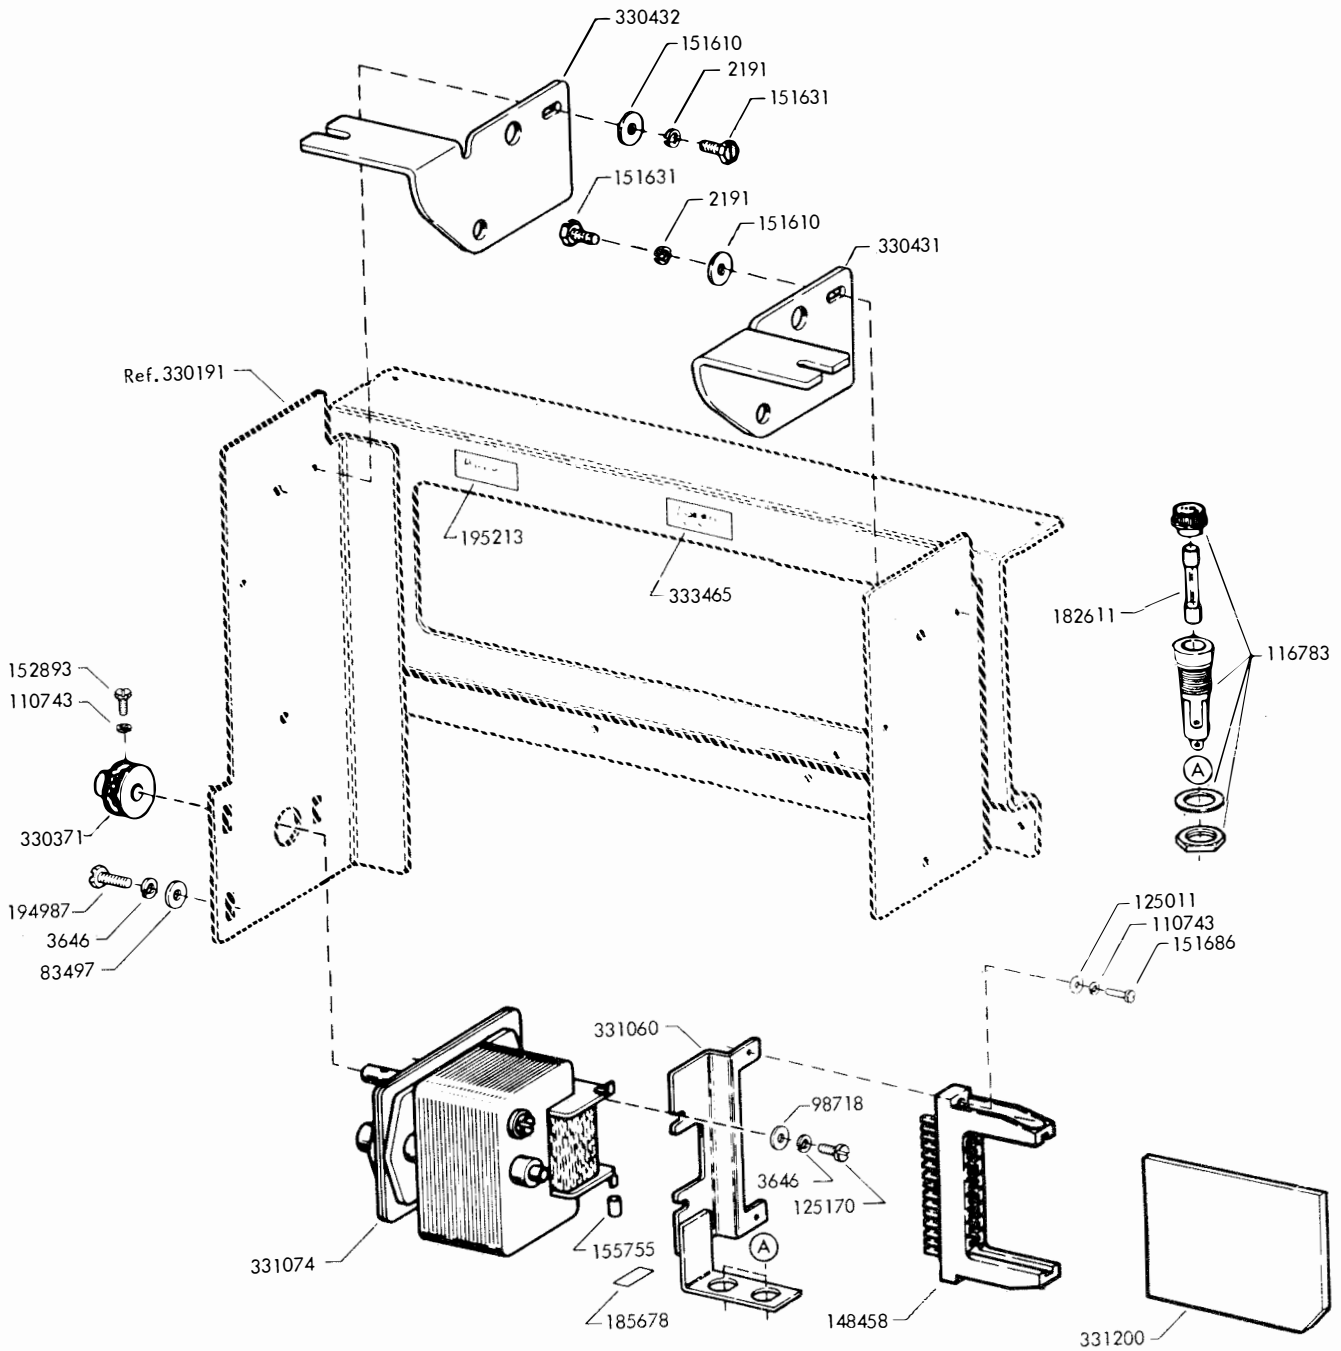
PAPER WINDER (DAPW) MOTOR AND MOUNTING BRACKETS
